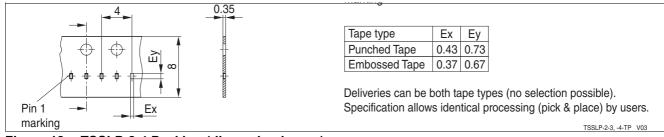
TSSLP-2-4 Packing (dimension in mm)
